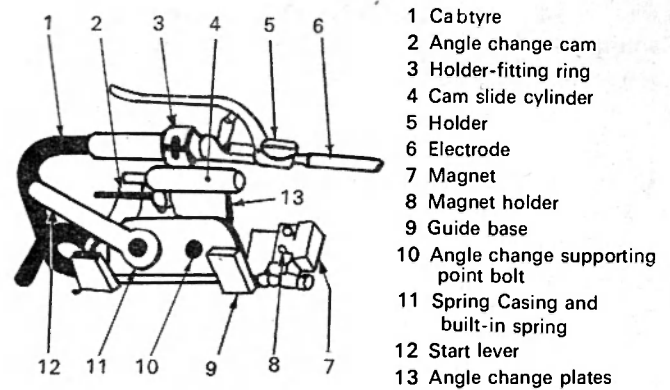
Example of inclination welding device (available for right and left horizontal fillet),
